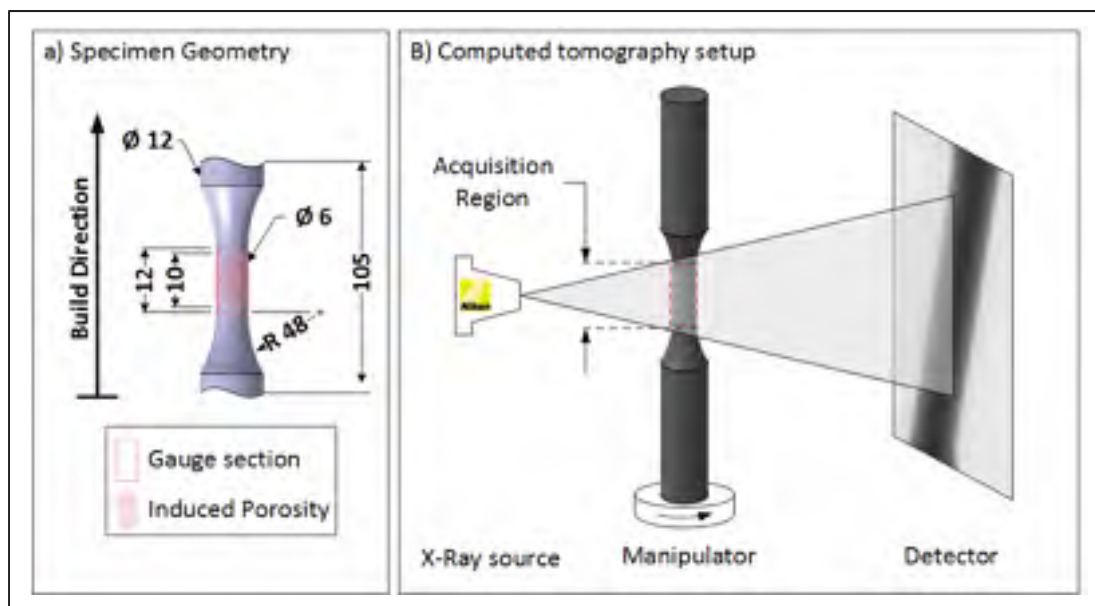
a) Dimensions of the as-machined fatigue specimens, b) Schematic representation of the computed tomography setup
